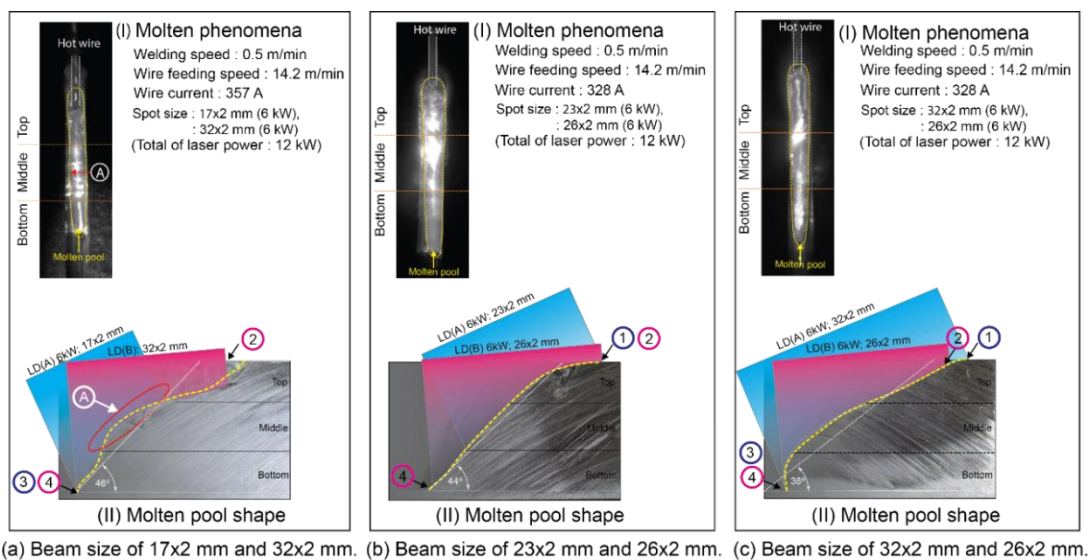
High-speed images of molten pool during welding and cross-sections of weld bead fronts in welding direction.
